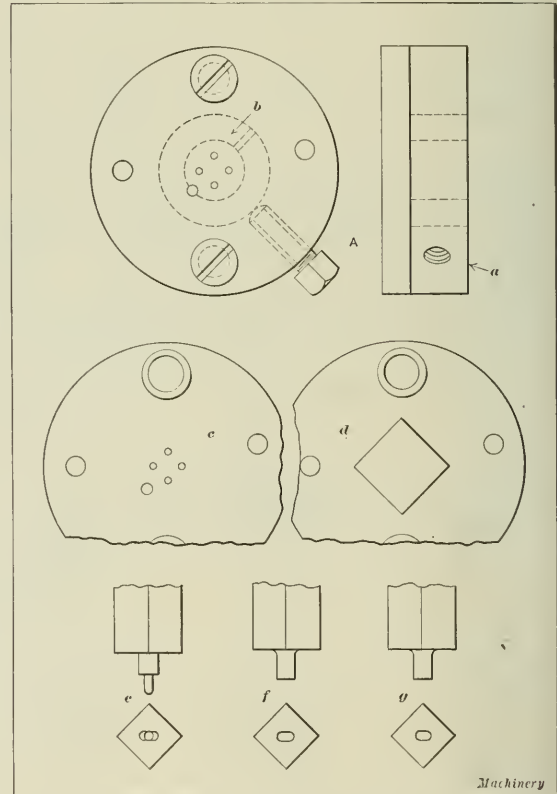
Fixture and Broaches for making Piercing Dies for Stud
